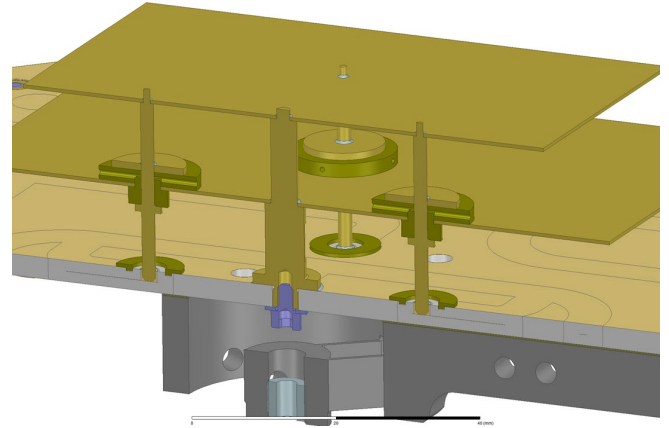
, Patch stack-up configuration where all joints are soldered including the upper patch.
